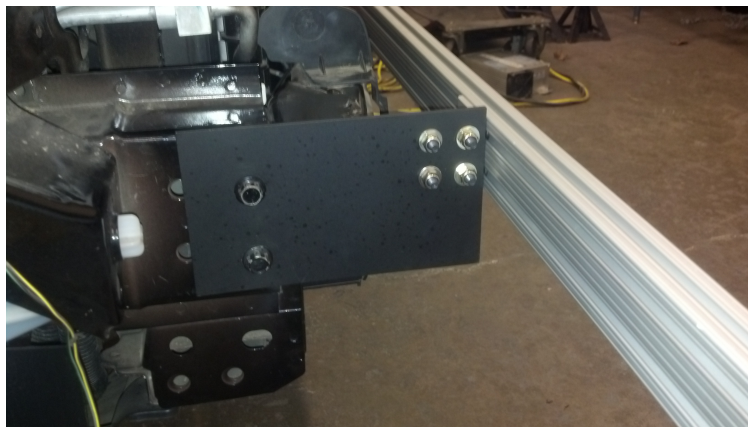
Outside view of one bracket mounted to the front passenger side.
